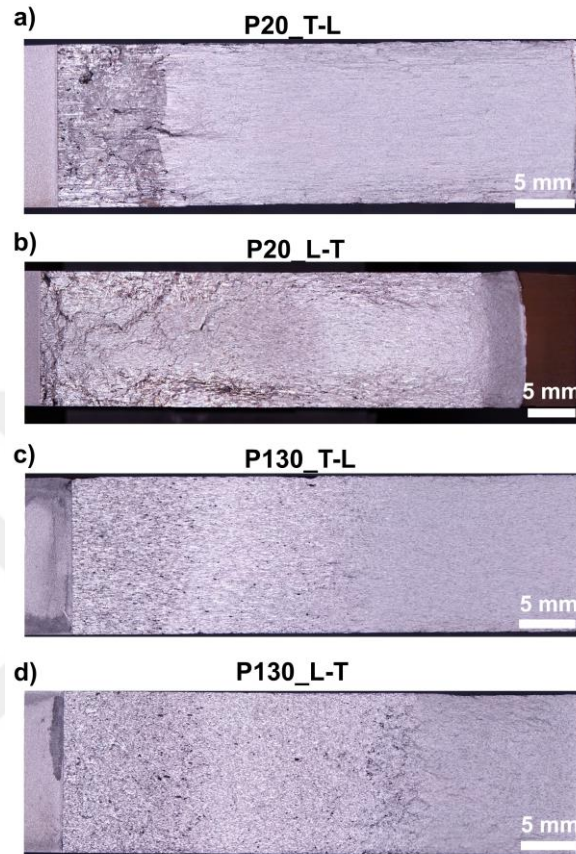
Stereomicroscope images of the fracture surface of a) P20_T-L, b) P20_L-T, C) P130_T-L, and d) P130_L-T.
